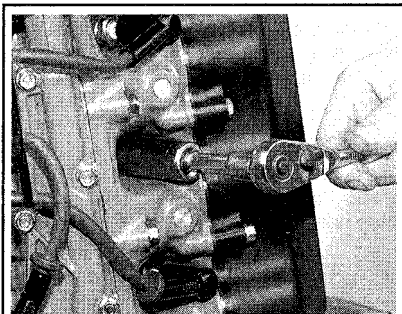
With the lead removed, loosen the plug using a plug socket...
